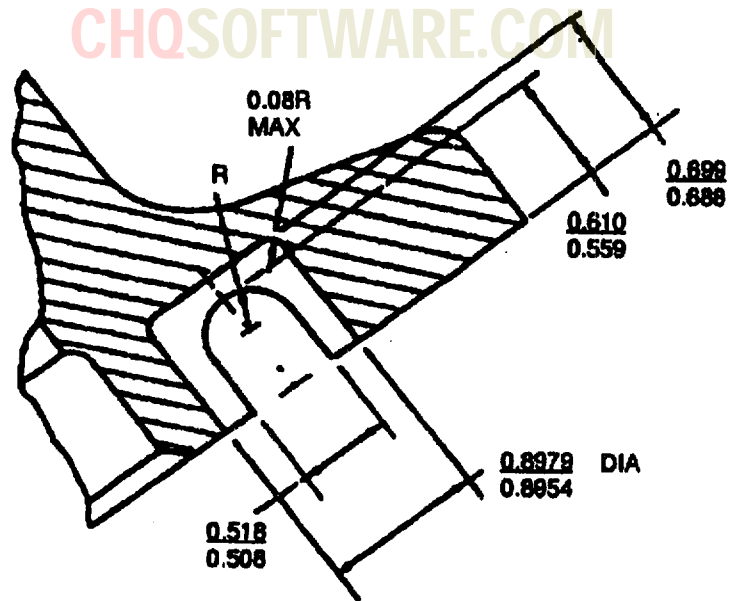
Inlet housing Assembly - Rework (Metric) (Sheet 3 of 4).
